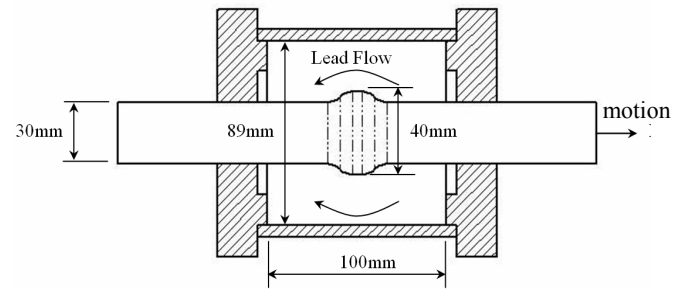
Cross-sectional view of the initial prototype design with damper dimensions
